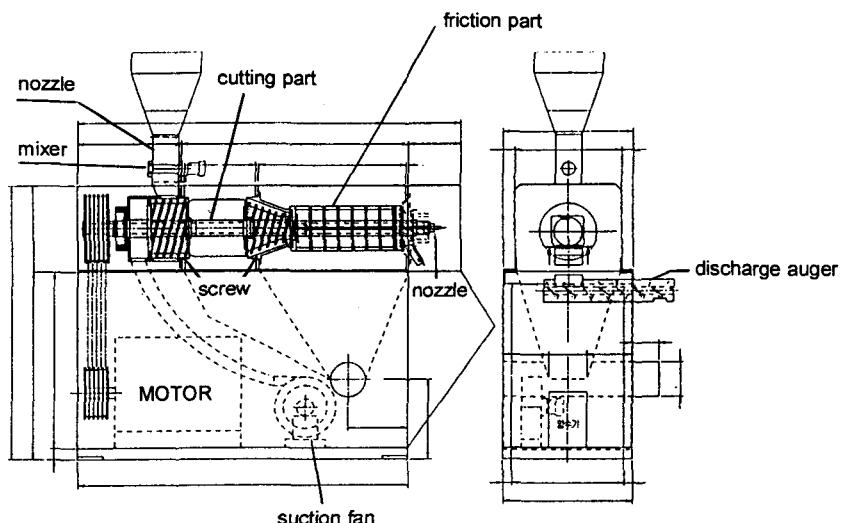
Structure drawing of one-pass rice whitener with hard metal blades.
